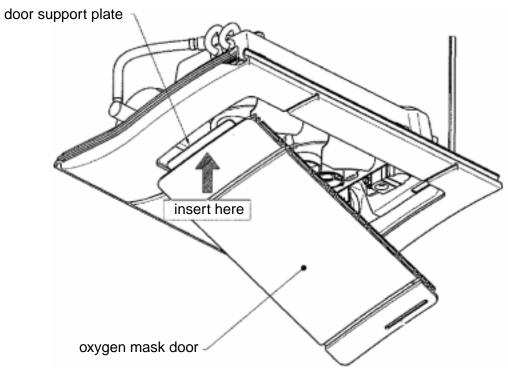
Right Hand Passenger Emergency Exit Mask Assembly
